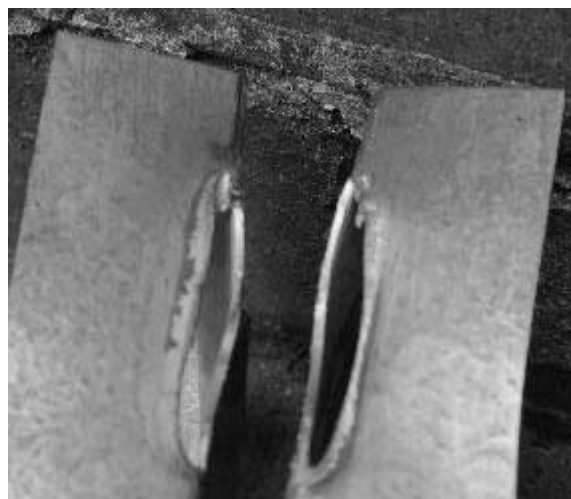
HAZ failure of flare-bevel welded connection in 1.5-mm G450 sheet steel
